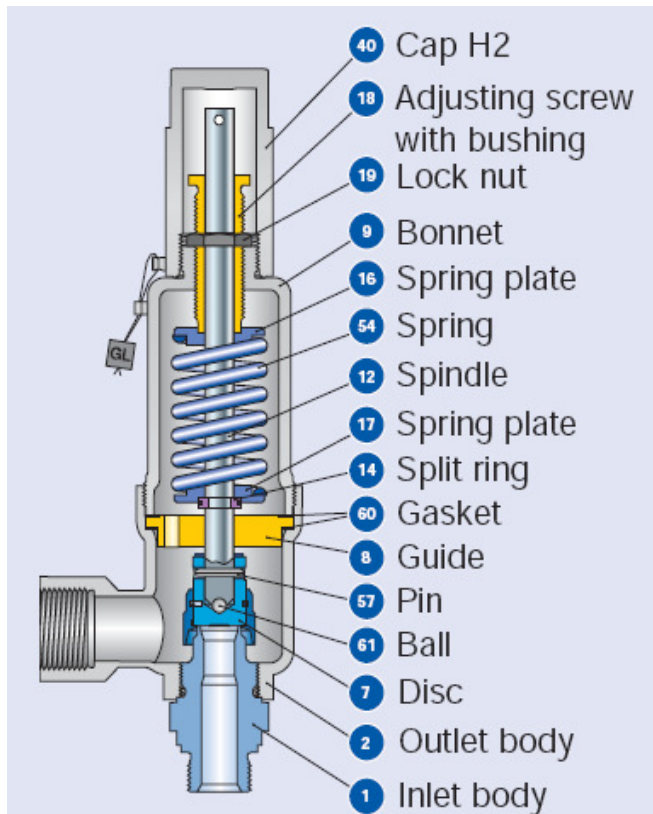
Parts of a conventional spring loaded safety valve - threaded
